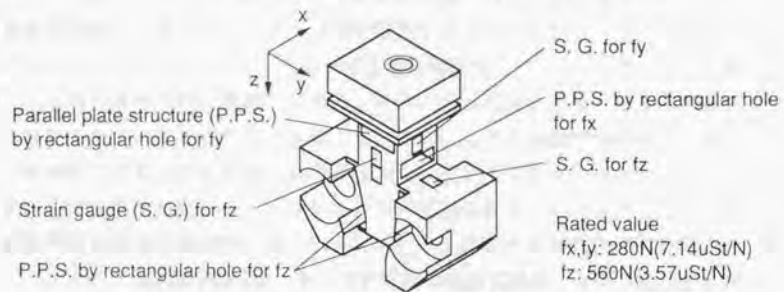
Sensing unit of 3-axis force sensing holder
